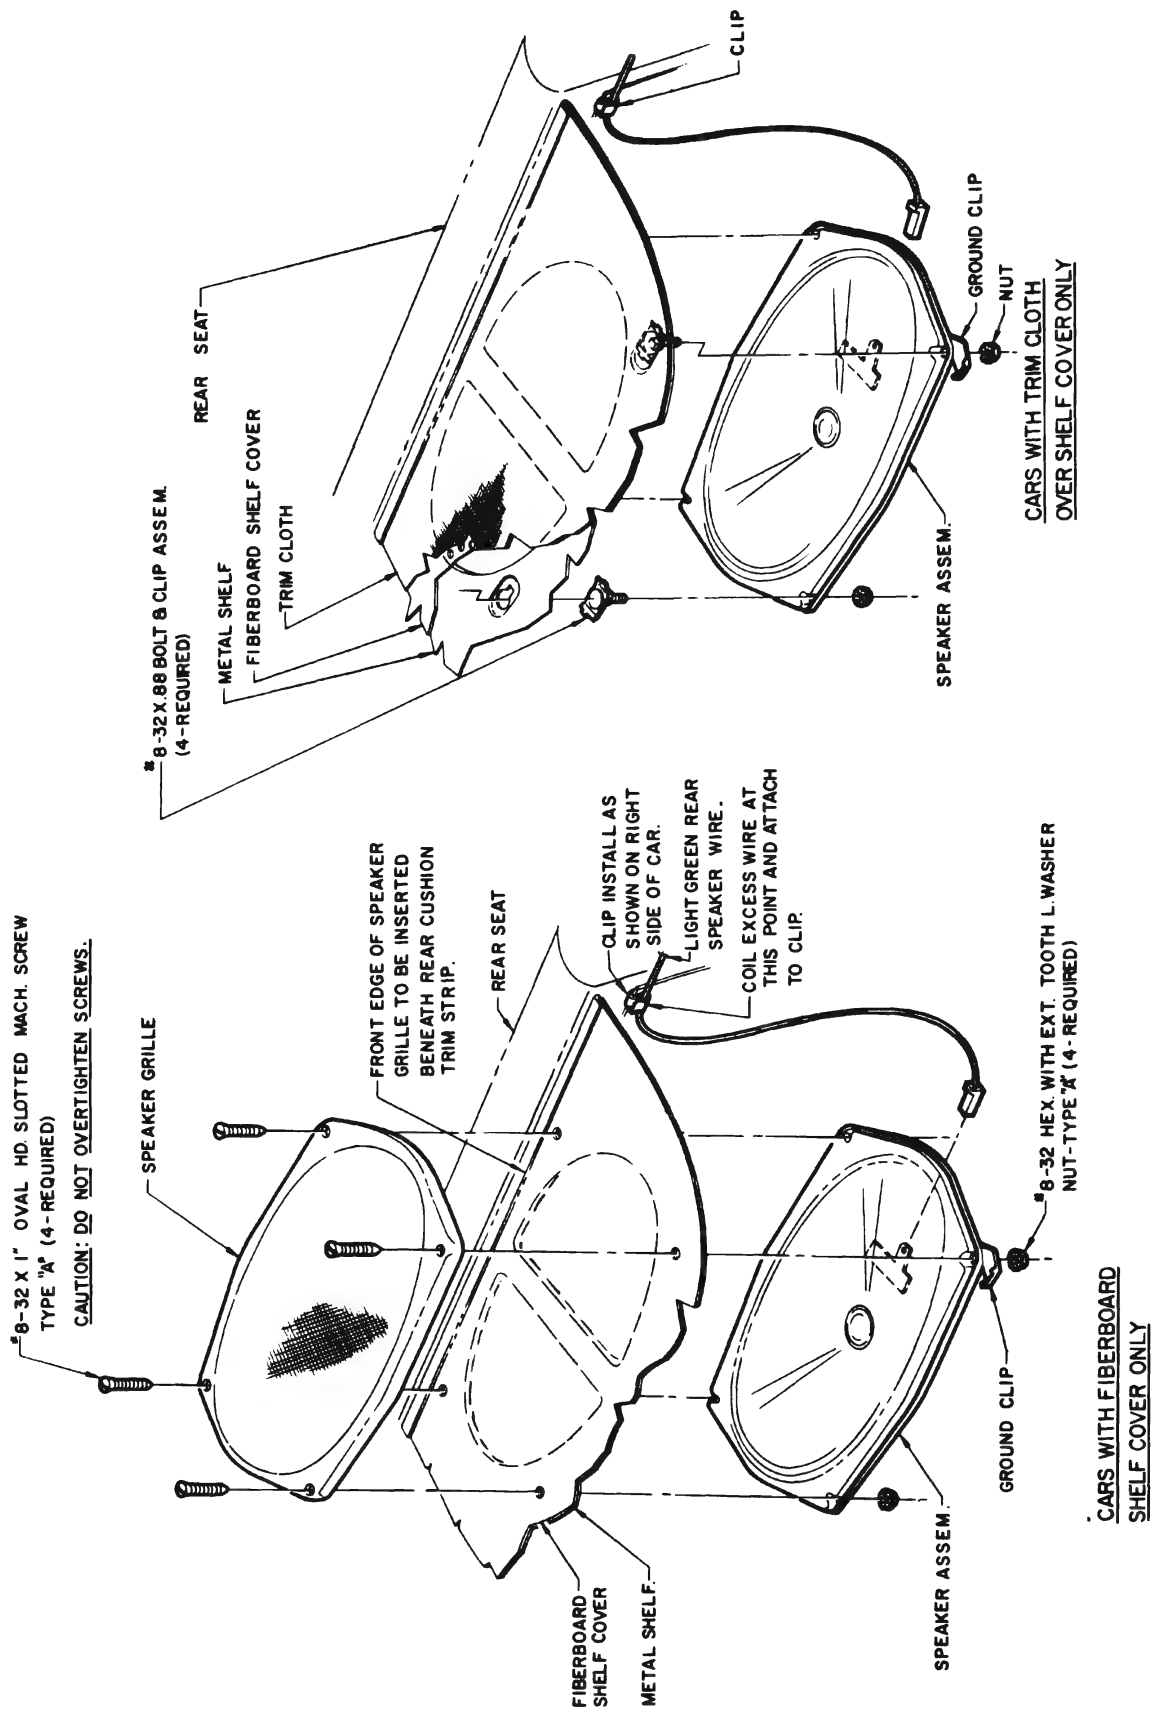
Rear Speaker Installation - 4400, 4600 and 4800 Series
